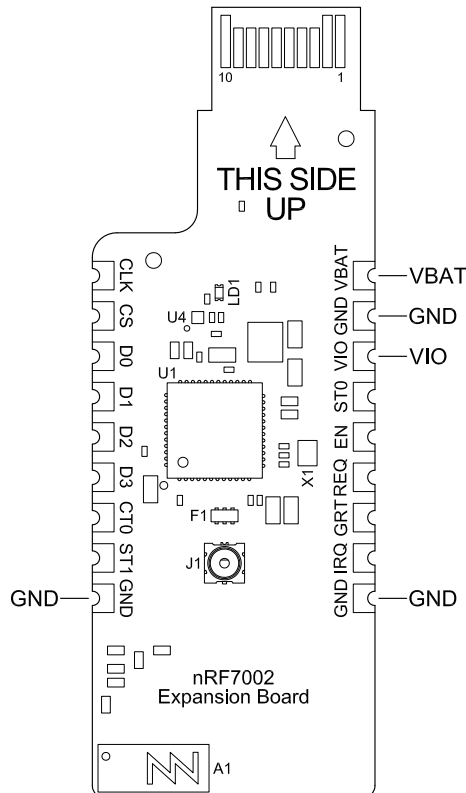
Castellated holes with VBAT on edge hole 10 and VIO on edge hole 12, front view
